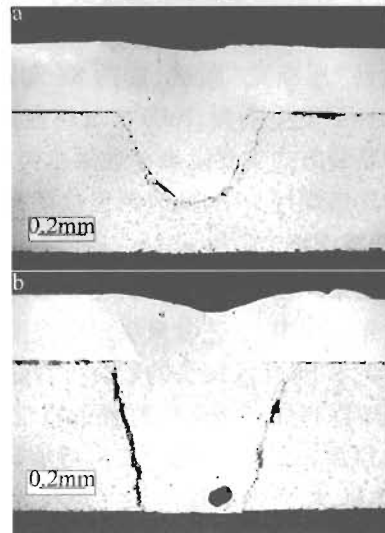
Nuggets formed under two different welding modes a—conduction type b—keyhole type
